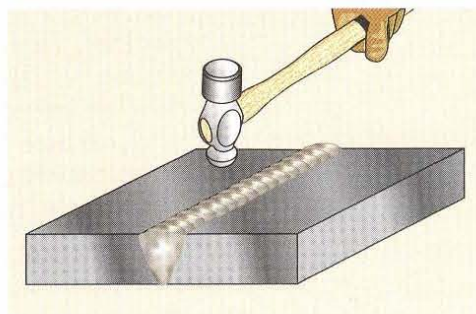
Peening relieves internal stresses in a weld and helps the welded joint stretch as it cools.
